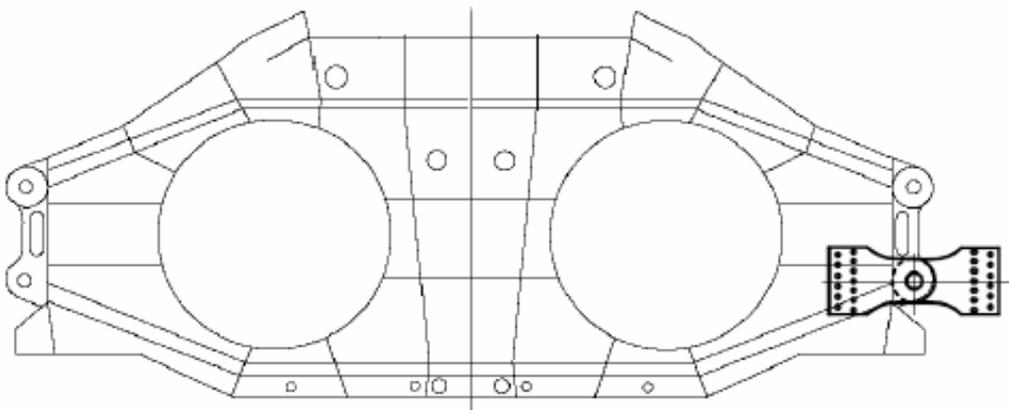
Sketch of the M346 fuselage frame with location of the attachment specimen.
